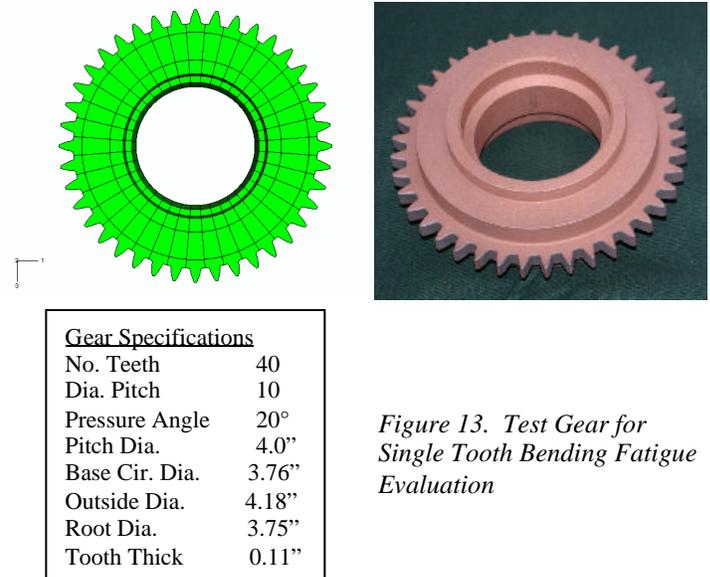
Test Gear for Single Tooth Bending Fatigue Evaluation
